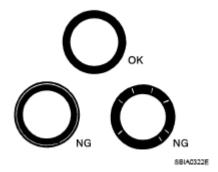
Identifying Valve Seat Contact Courtesy of NISSAN MOTOR CO., U.S.A.
